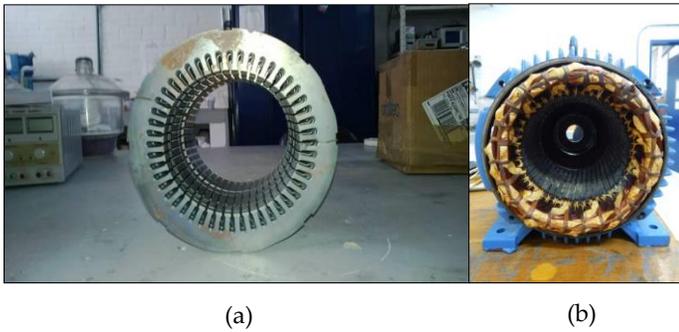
Motor utilized as base – (a) Stator – (b) Stator embedded in the housing [6]
